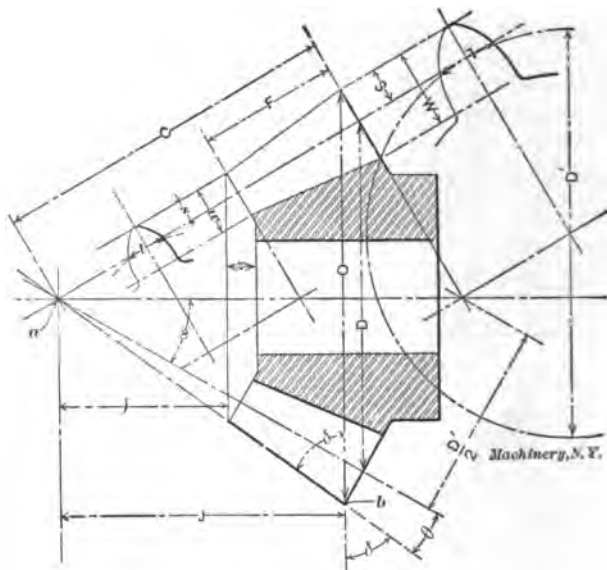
Diagram Explaining Certain Calculations Relating to Bevel Gears
